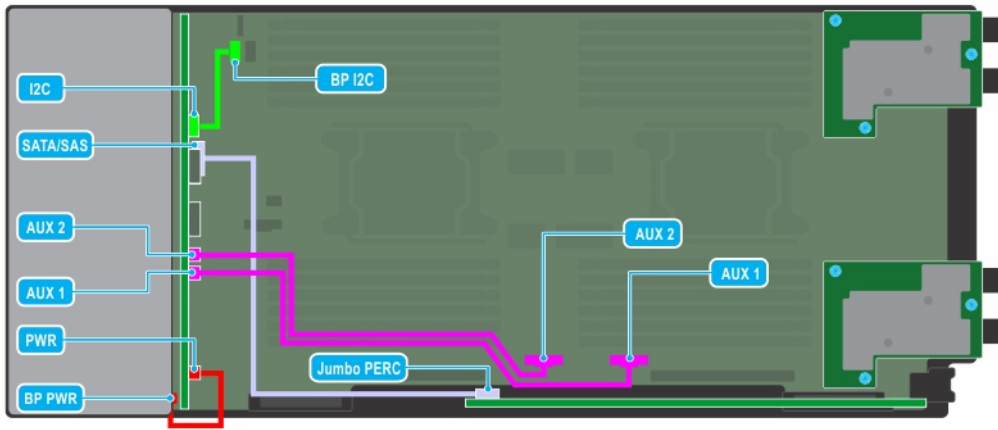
Cable routing - 8 x 2.5 inch drive backplane with Jumbo PERC card
